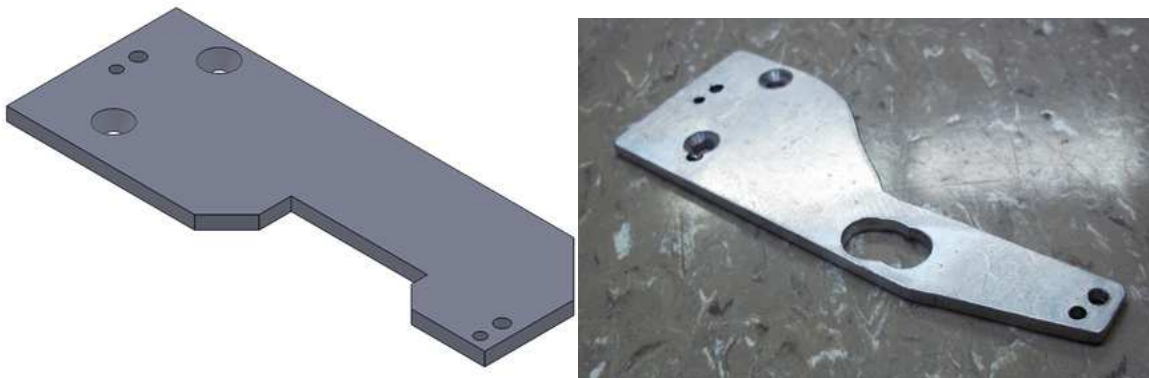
Computer model of fuel tank mounting plate (left), and actual machined part (right).
